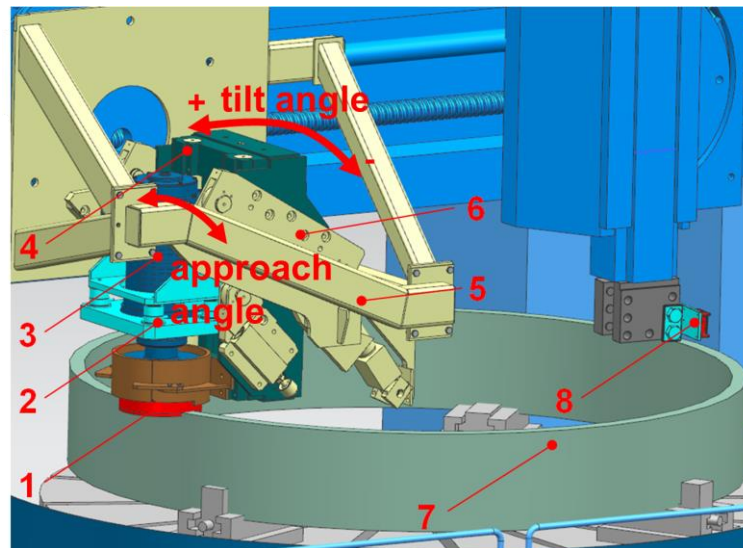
Experimental set-up: 1 grinding wheel, 2 force measurement system, 3 spindle motor, 4 vertical pneumatic cylinder, 5 frame, 6 milled slide, 7 workpiece, 8 laser sensor.
